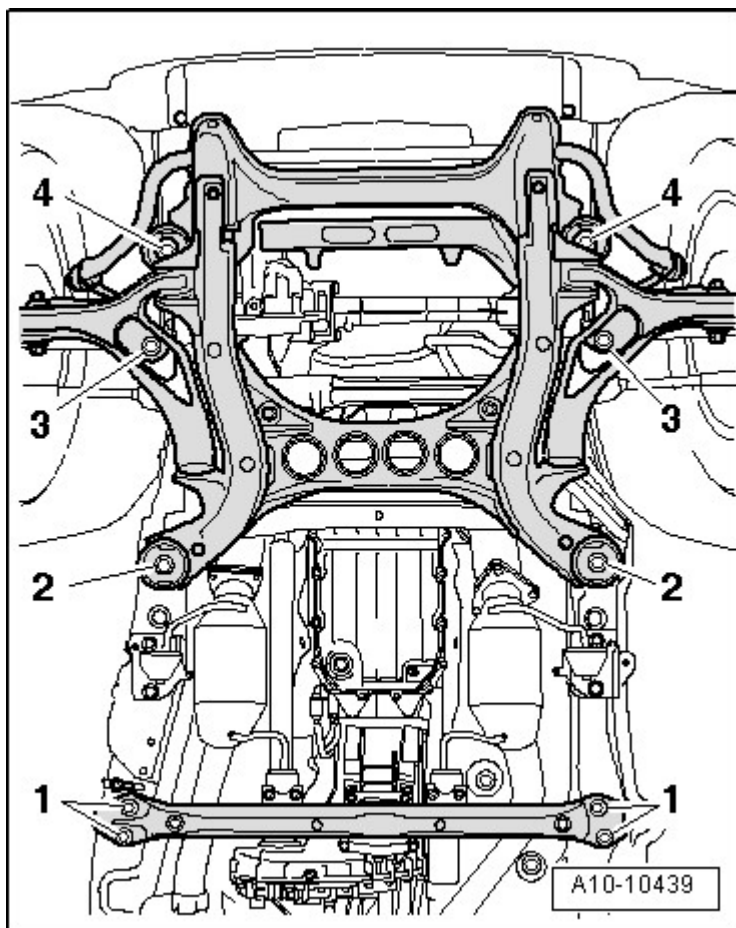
Identifying Bolts -4- And Engine Carrier Bolts -3-
